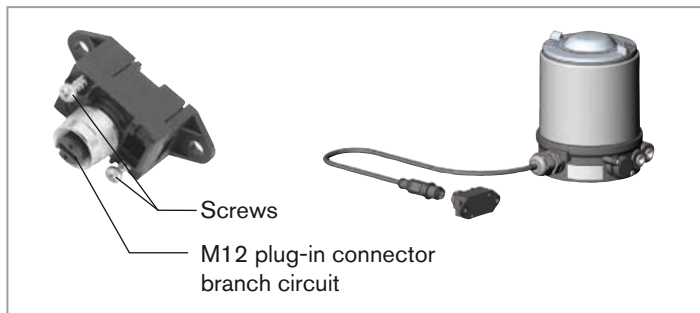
Control head 8695 with multi-pole cable and ribbon cable terminal
